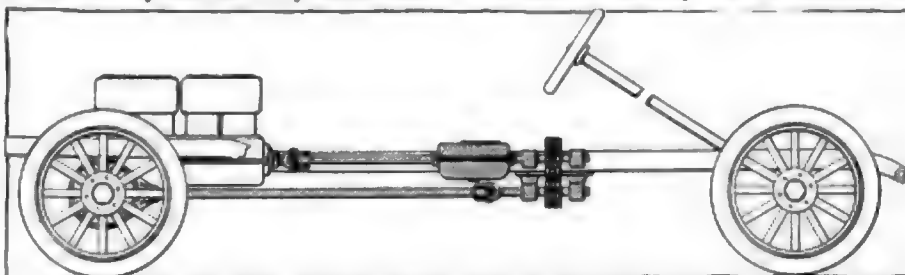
DESIGN FOR EASY-RIDING MOTOR CAR IN WHICH MOTOR IS LOCATED OVER THE REAR AXLE AND GEARBOX LOCATED CENTRALLY BETWEEN THE AXLES
